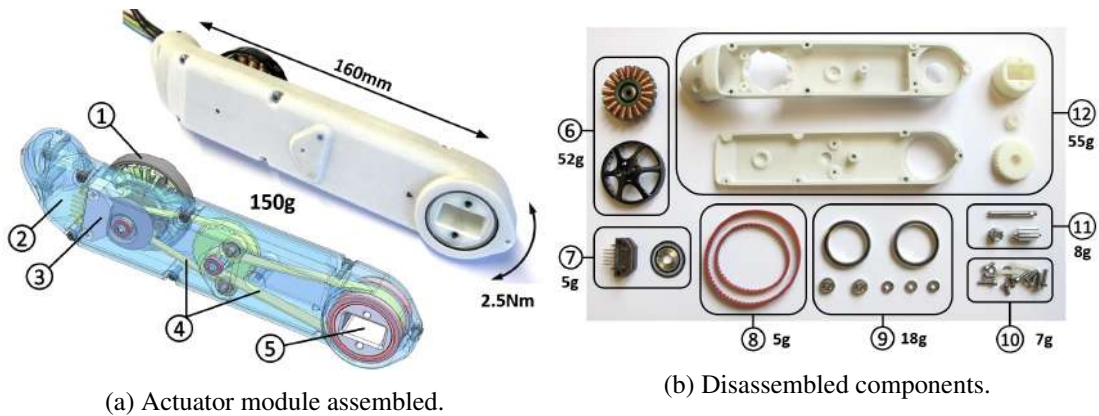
Brushless actuator module (a) assembled and (b) disassembled. BLDC motor ①, two-part 3D printed shell structure ②, high resolution encoder ③, timing belts ④, and output shaft ⑤. Brushless motor ⑥, optical encoder ⑦, timing belts ⑧, bearings ⑨, fasteners ⑩, machined parts (motor shaft and pulleys) ⑪ and 3D printed parts ⑫. Figure extracted from [Gri+20].
